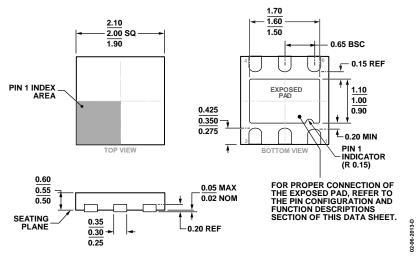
6-Lead Lead Frame Chip Scale Package [LFCSP\_UD] 2.00 mm × 2.00 mm Body, Ultra Thin, Dual Lead (CP-6-3) Dimensions shown in millimeters
